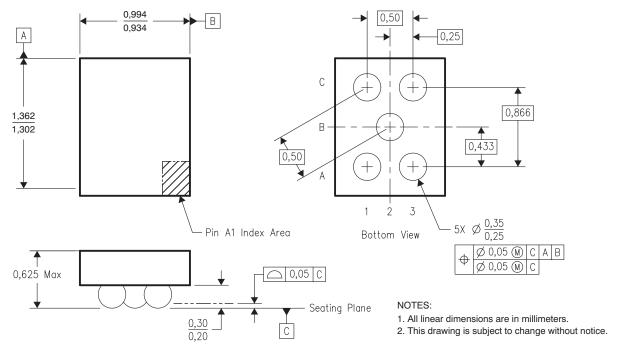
YZU Wafer Chip-Scale Package Dimensions (in mm)
